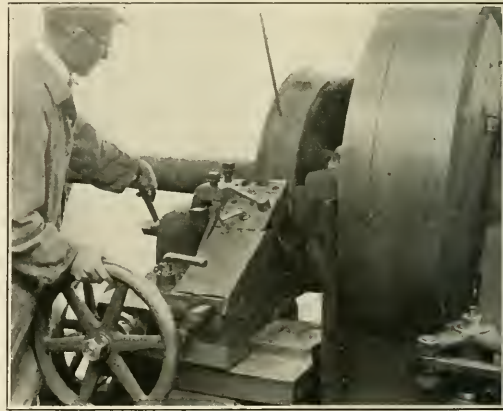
Turret Tool Post Just Being Turned to Bring the Finishing Tools Into Play
